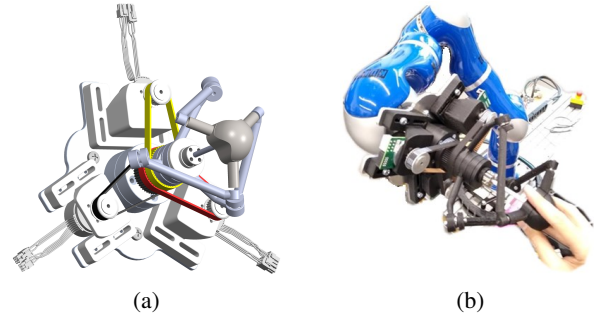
(a) CAD model of the newly introduced CoaxHaptics-3RRR, and (b) assembly on a DLR LWR.
